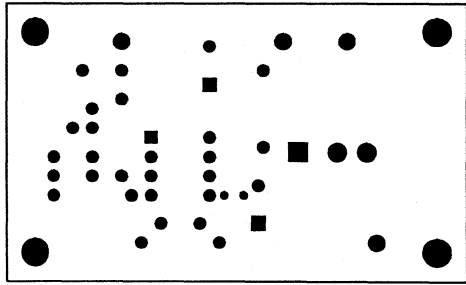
DIP PC Layout, Drill Guide (1X Scale)
